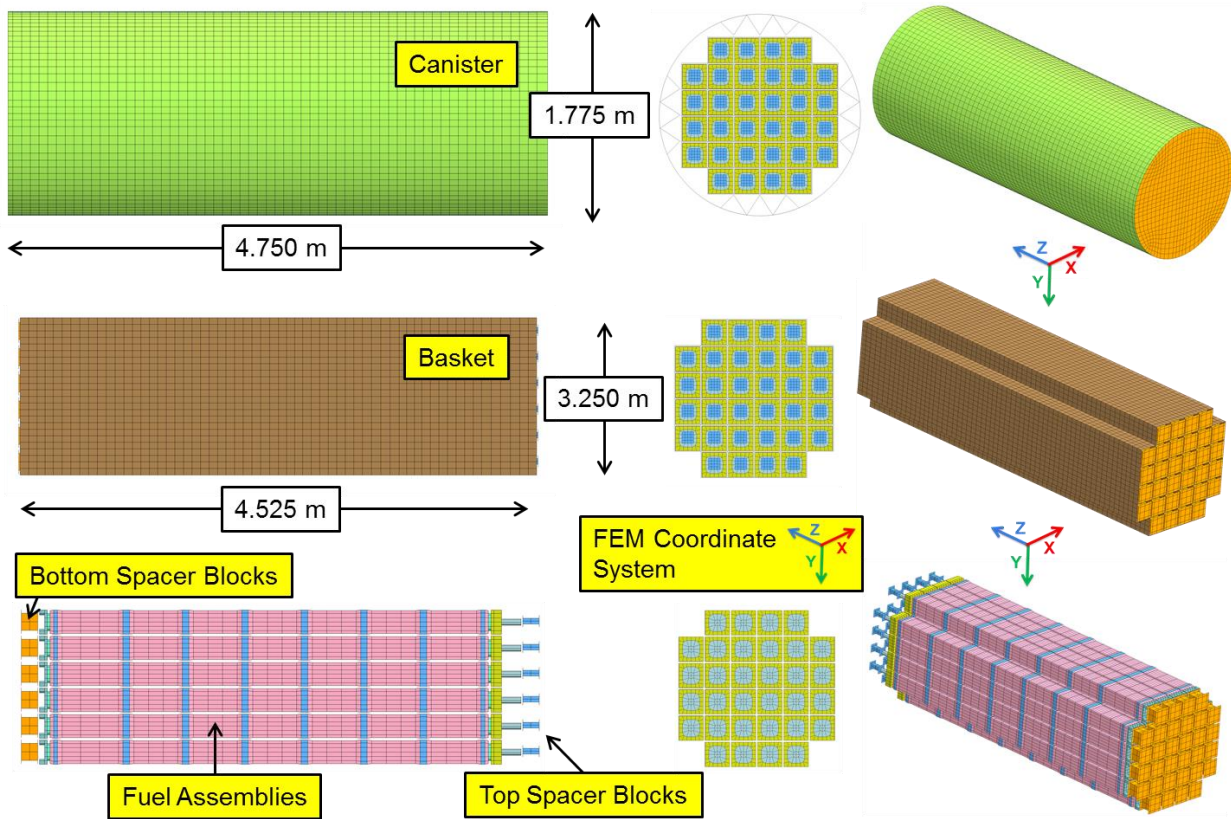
Canister, Basket, and Fuel Assembly Components of Cask Assembly Model
